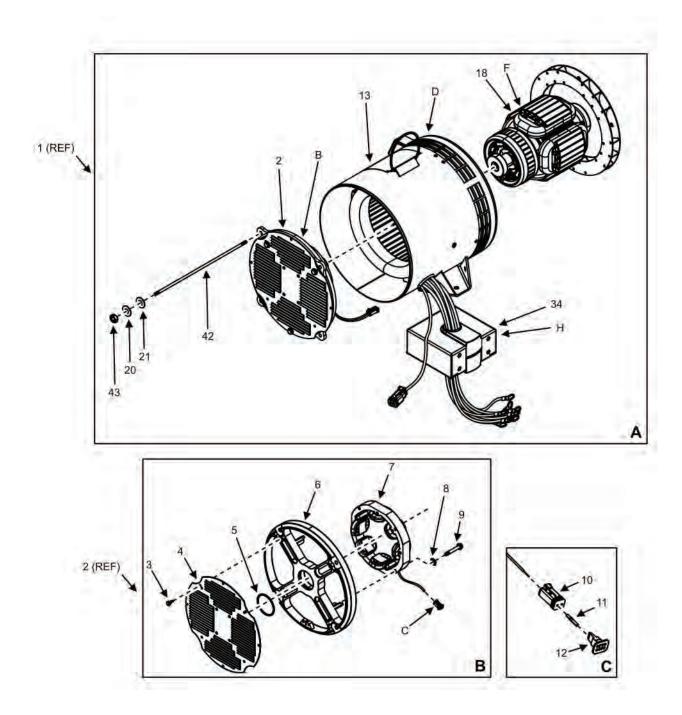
AC Generator Assembly, 50/60 Hz (Sheet 2 of 4).
